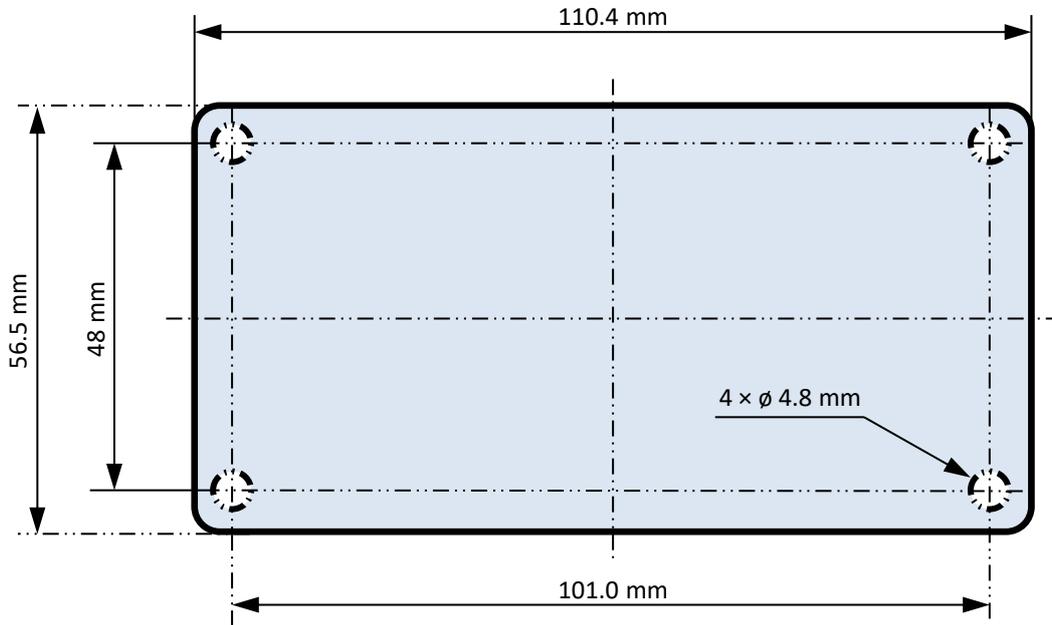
dimensional drawing of the electronics OEM-HF-R845-ET
